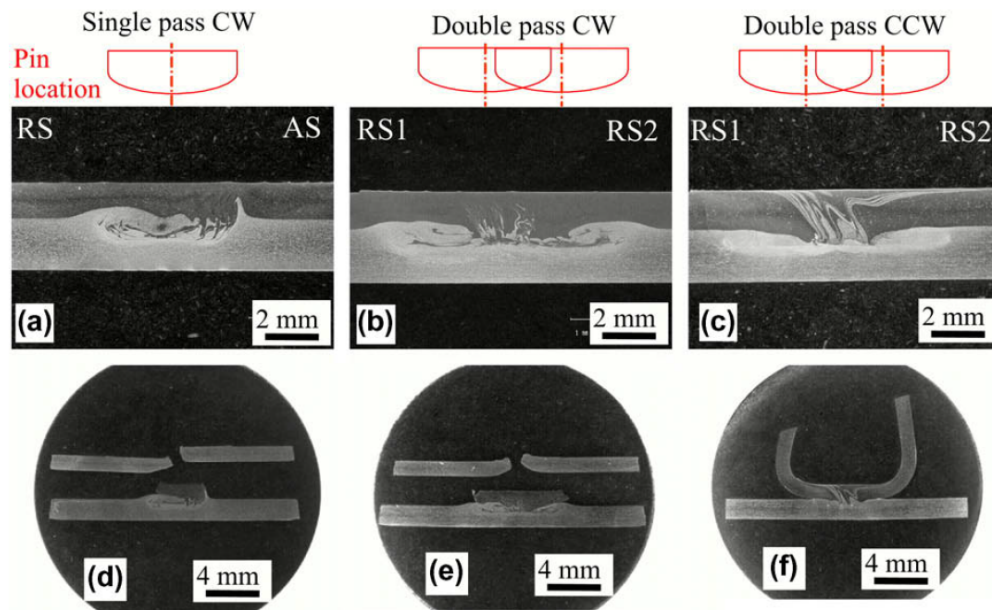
Cross section of skin / stringer joints after welding (above) and after bending tests (below) [40]
